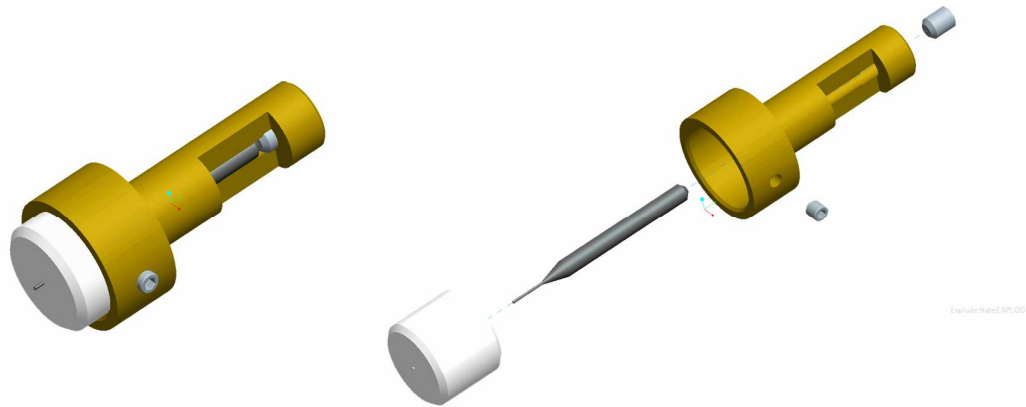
TOOL SUPPORT AND ADAPTOR
